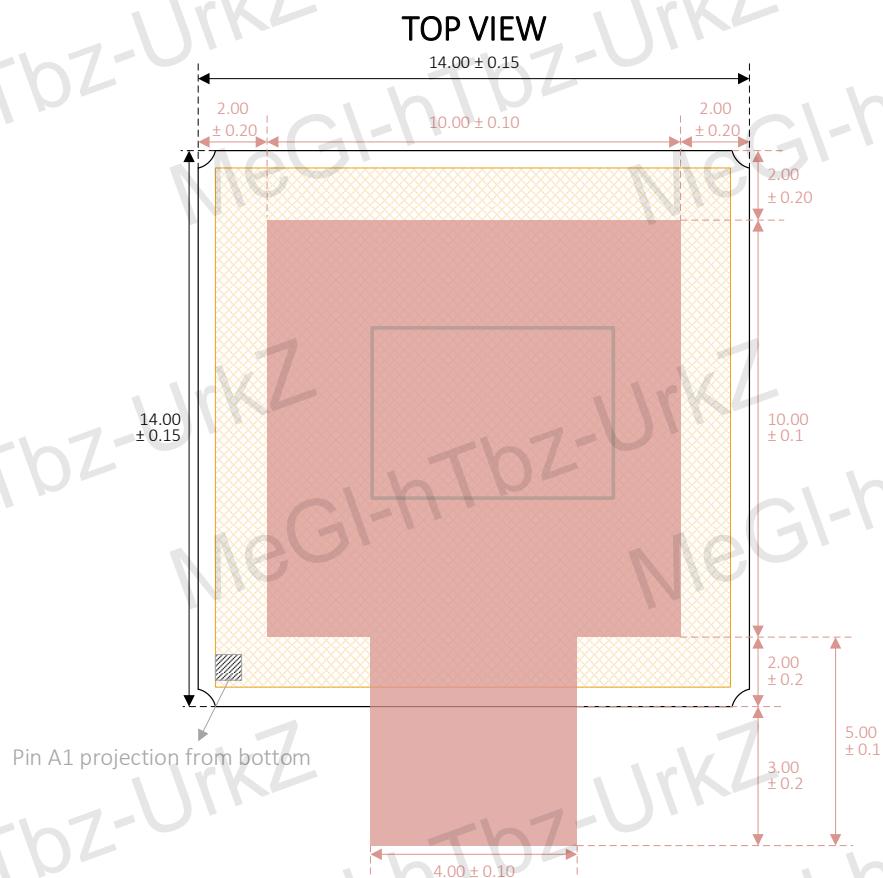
MLX75027RTC Cover Tape Dimensions (mm)
